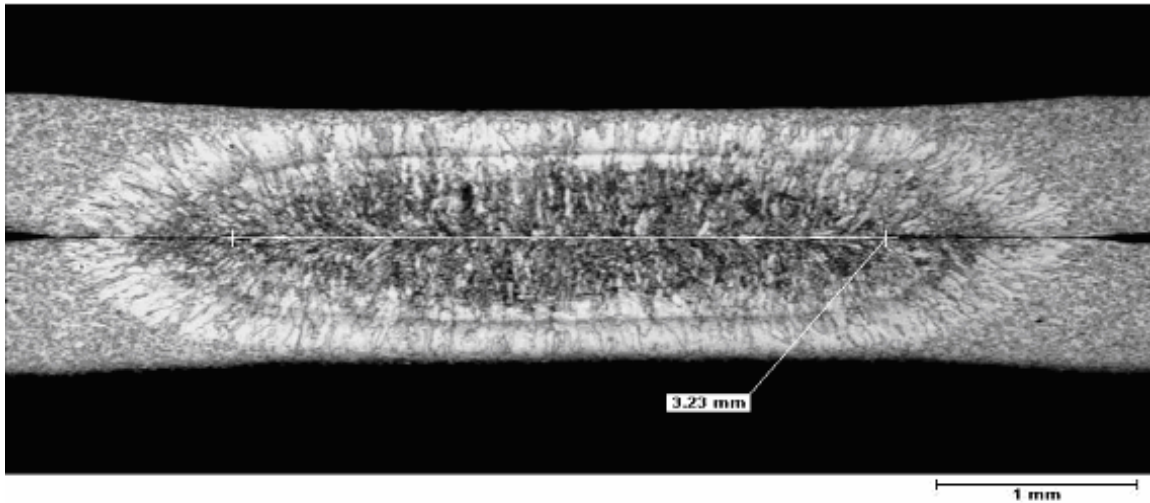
Metallography of weld spot nuggets of step 1, welded sample, Dalex PMS
